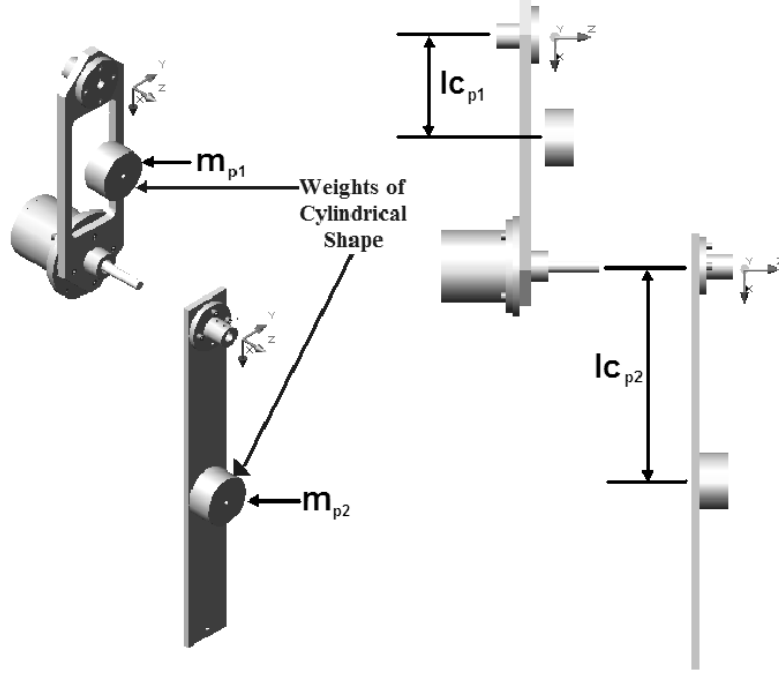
CAD drawing of the Pendubot with the added cylindrical weights
